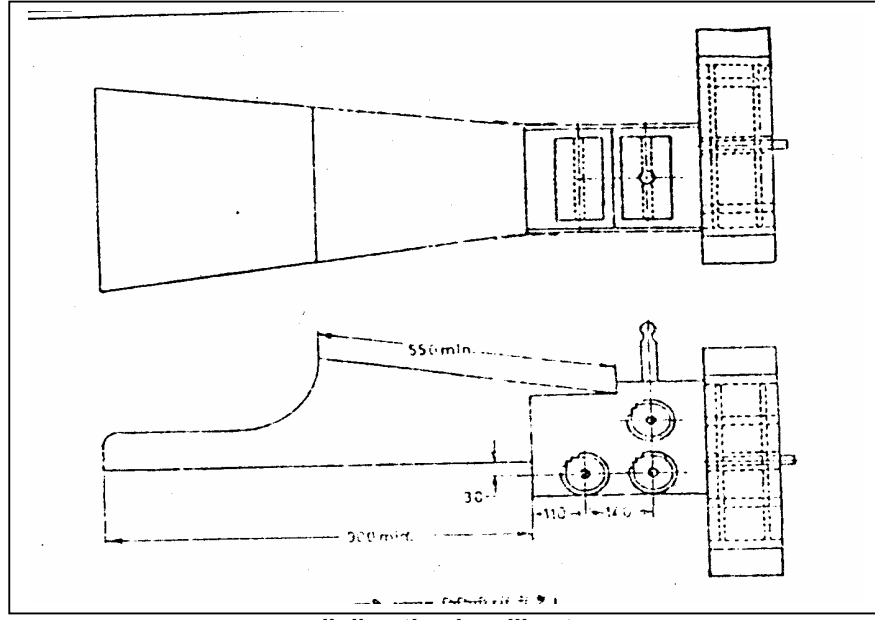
SAFE FEEDING CHUTE USED ON A CHAFF-CUTTER TYRE THRESHER
